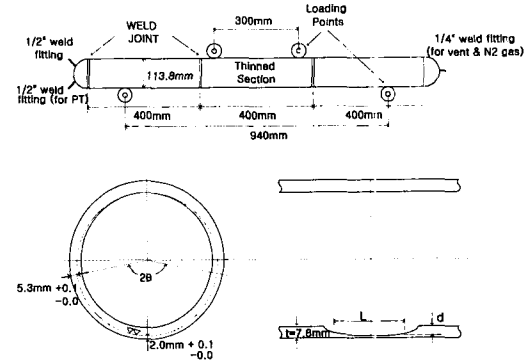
Geometry of pipe specimen and local wall thinning shape
